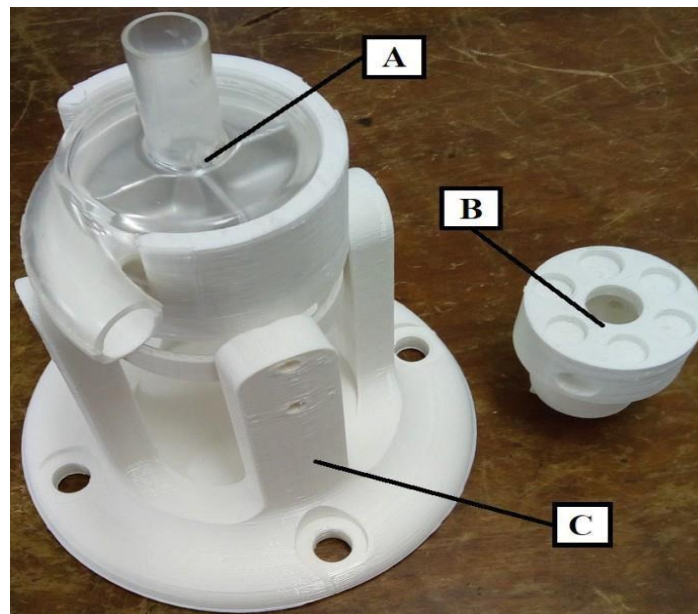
The assembly of the HPB mechanical components built on the 3D printer: A) VAD prototype at IFSP; B) The magnetic coupling between the HPB mechanical components and the VAD rotor; and C) HPB assembly with VAD docked.
